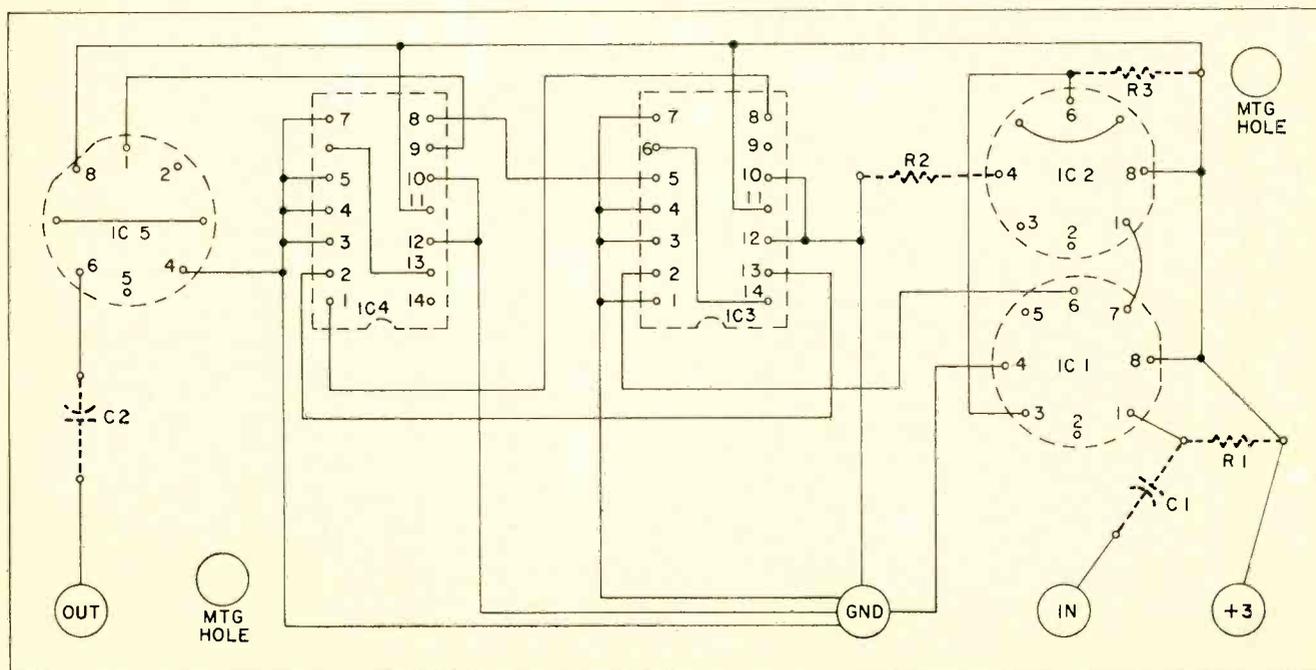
Author used a glass fiber board for parts mounting; a perforated phenolic board would do just as well.
